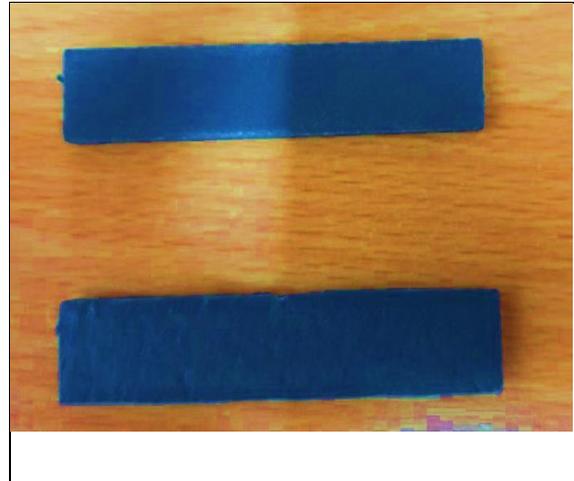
Photograph of Impact test specimen fabricated as per ASTM D256 standard
